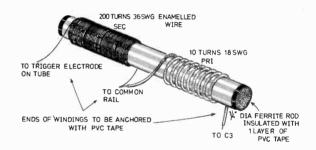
Winding details of trigger transformer. Both windings are wound in the same sense
